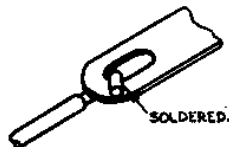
JACK AND KEY SPRING TYPE TERMINAL.
